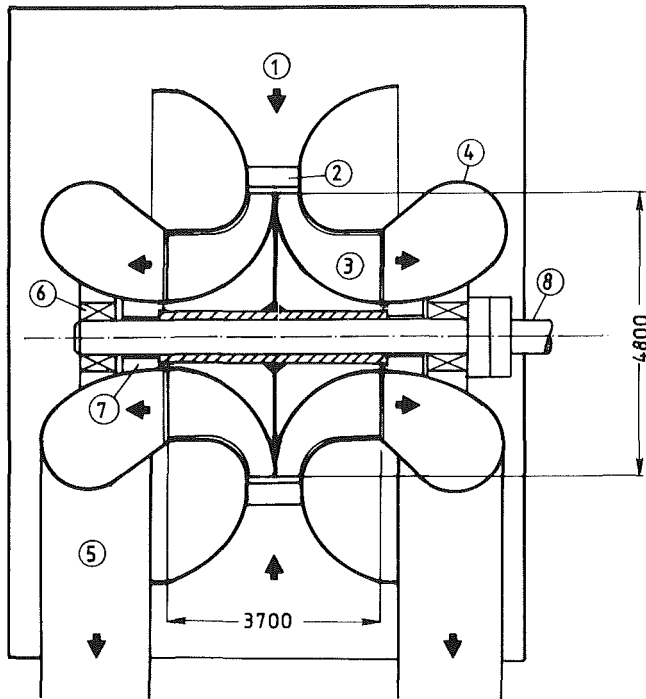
Single-stage double inflow radial steam turbine, dimensions in mm: 1 = inlet from evaporator, 2 = stator, 3 = rotor, 4 = exit diffuser, 5 = exit pipe, 6 = bearing, 7 = sealing, 8 = coupling; number of blades $n = 23$
